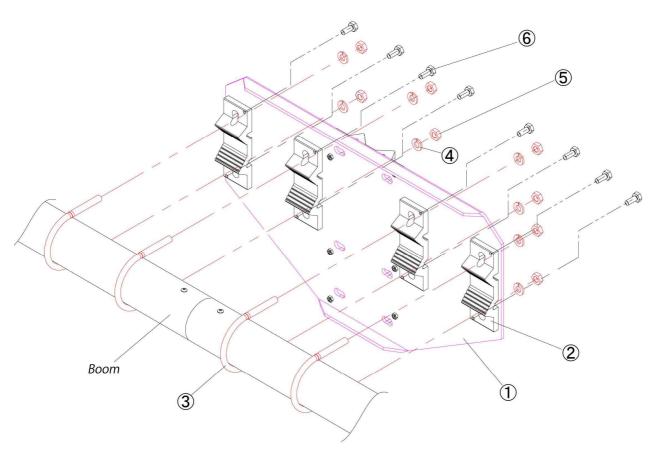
Assembling and Attaching Mast Clamp to the Boom.
